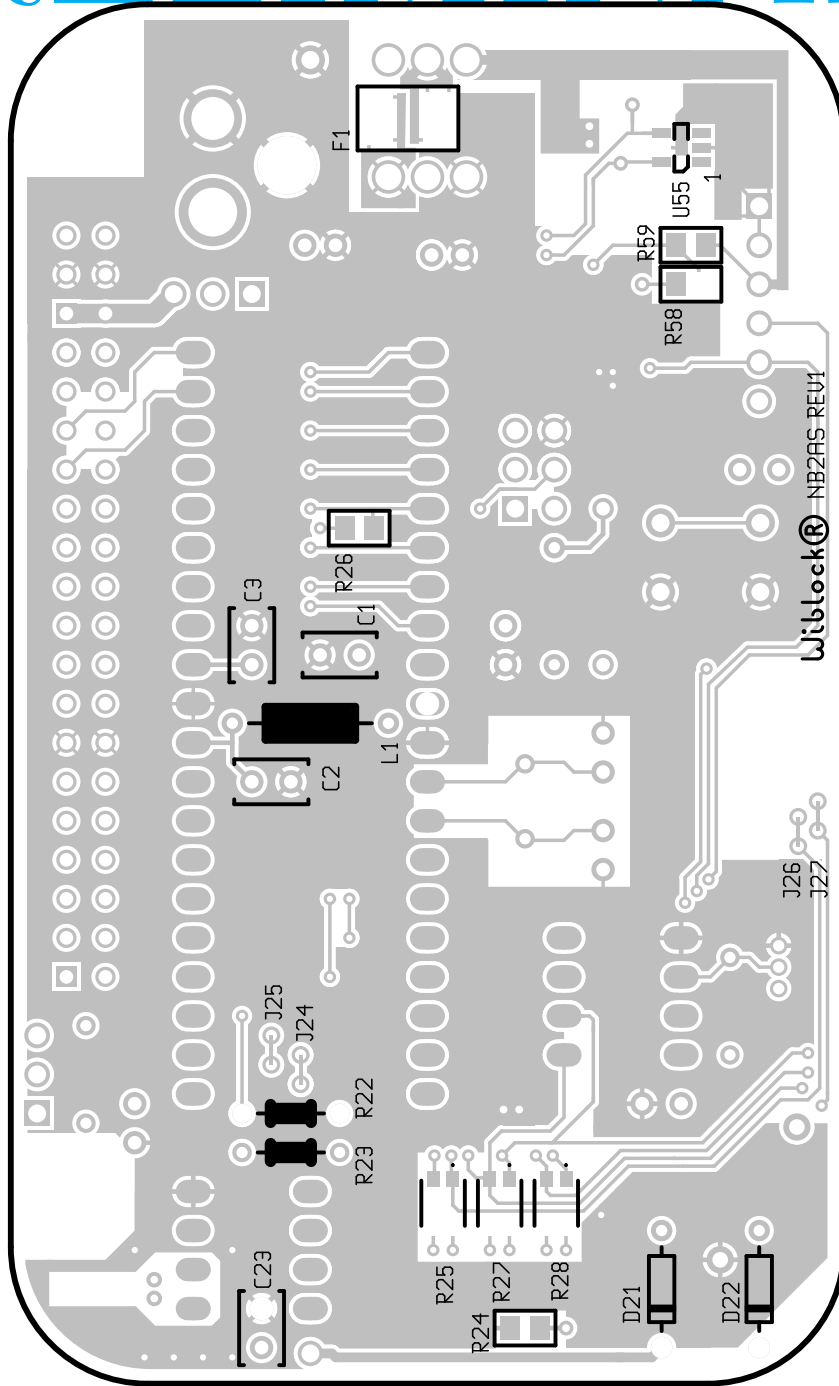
NB2AS Bottom Side Assembly Drawing (Rev 1)
